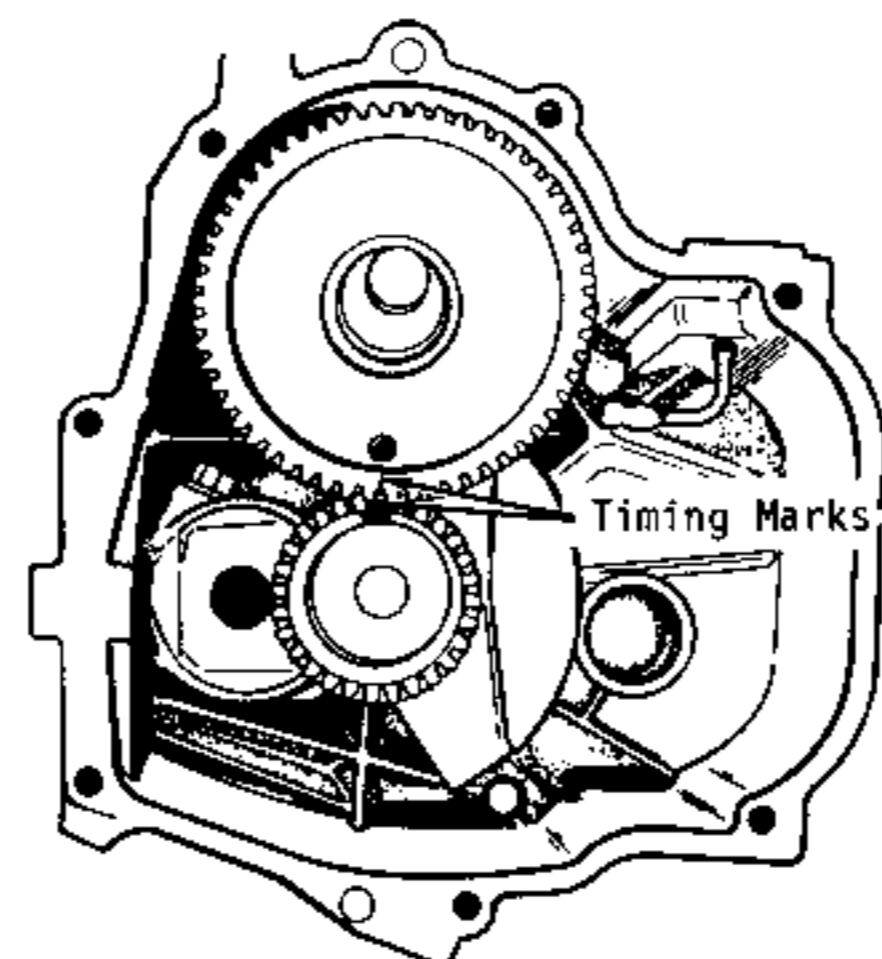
Camshaft and crankshaft timing marks must be aligned after installation for proper valve timing.
